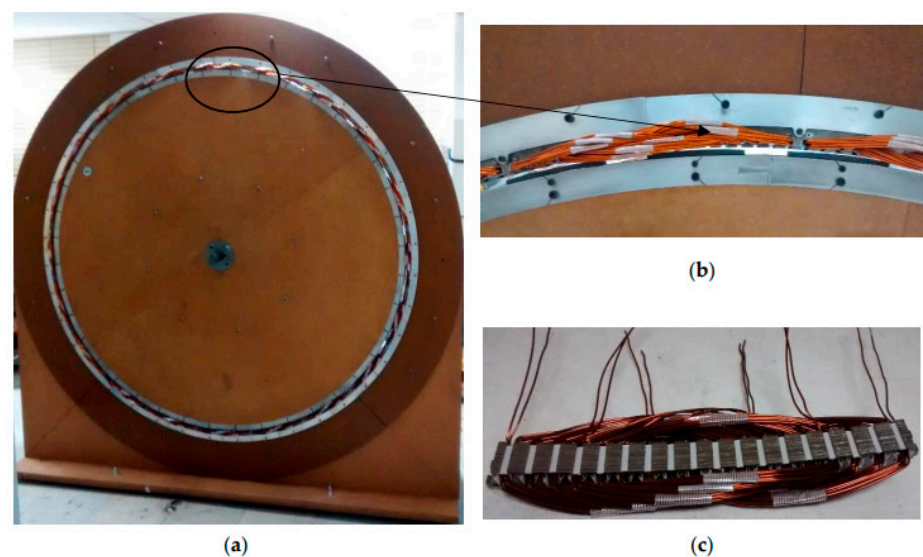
(a) Prototype structure of the stator modular ring generator; (b) one stator module; (c) detail of the assembly of rotor and stator.
